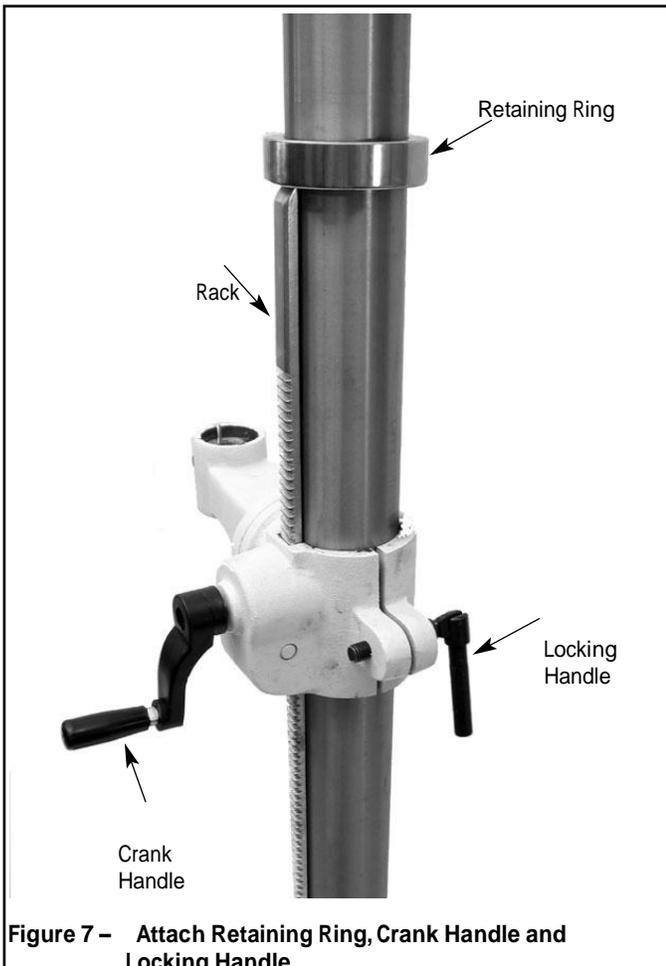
Attach Retaining Ring, Crank Handle and Locking Handle
